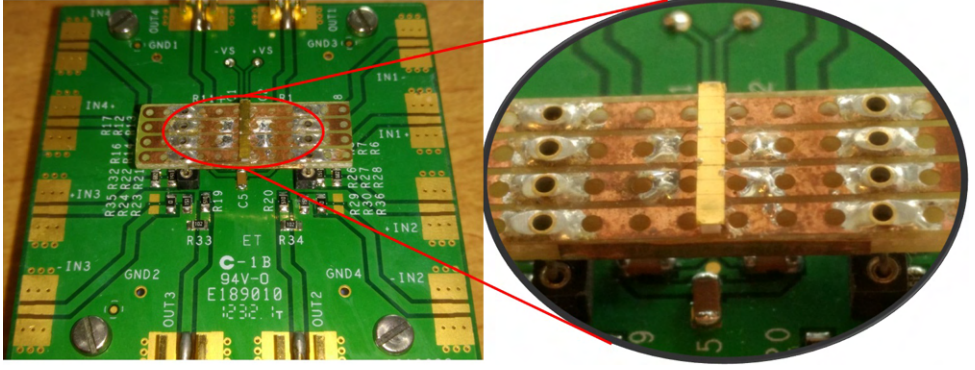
The read out circuit with 4 LNAs (left side) where the 28 μm -thick PVDF array (right side) is directly connected to it using a PCB board.
